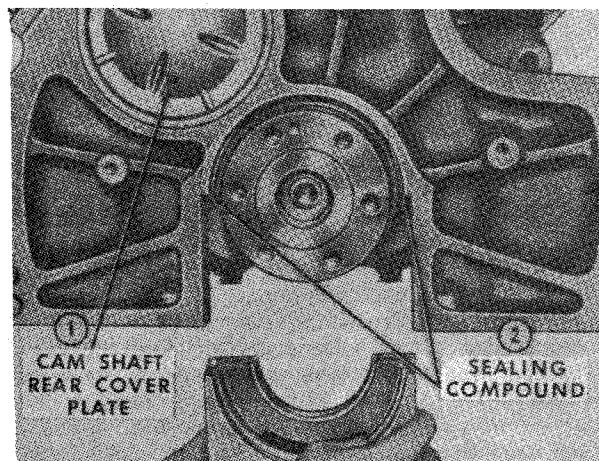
Installing rear main bearing cap with side seals; seals should protrude slightly above block face of cap as shown. Apply light coat of sealing compound to block and cap mating surfaces.
